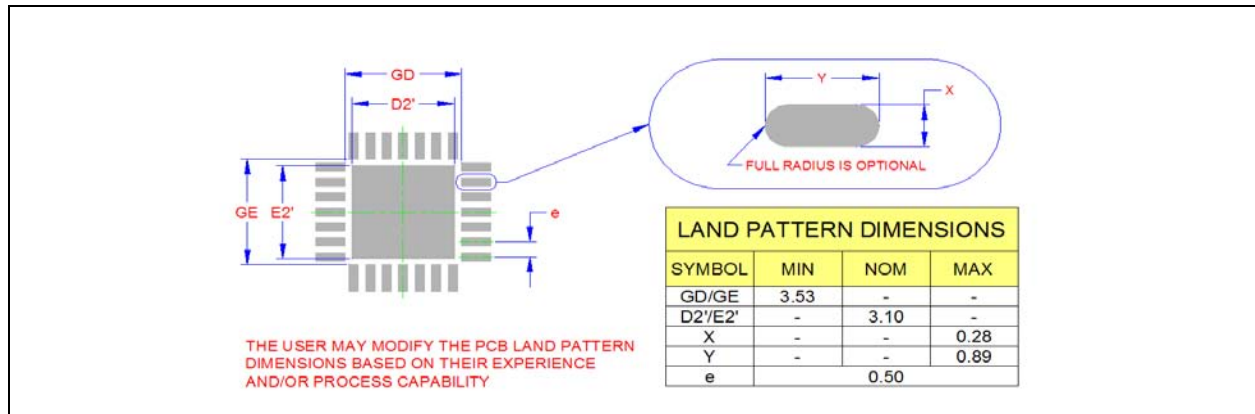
EMC2106 Recommended PCB Footprint Design for 28SQFN-5x5 Body
